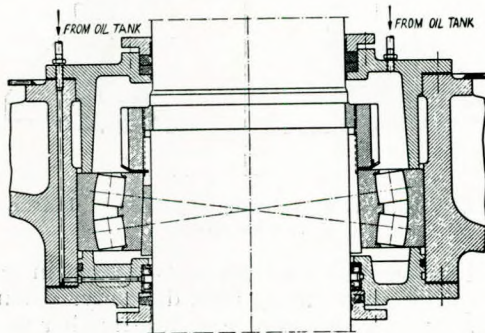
Lower roller-type rudder stock bearing for the rudder shown in Fig. 3.
